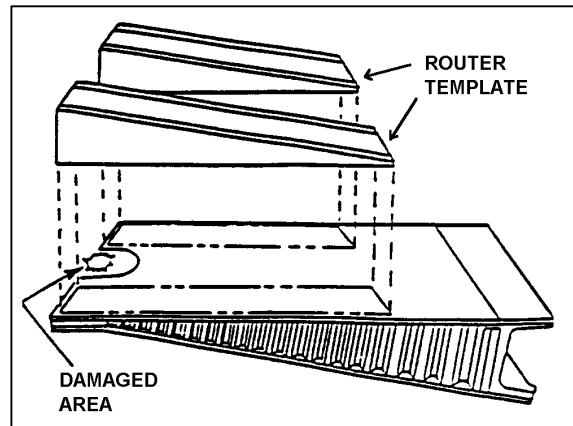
Removing honeycomb core from a tapered control surface.
